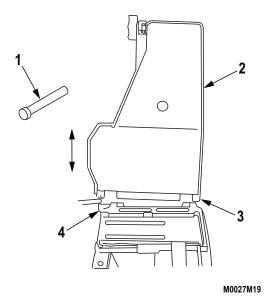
Feed Tray and Feed Slide Assembly Installation.
